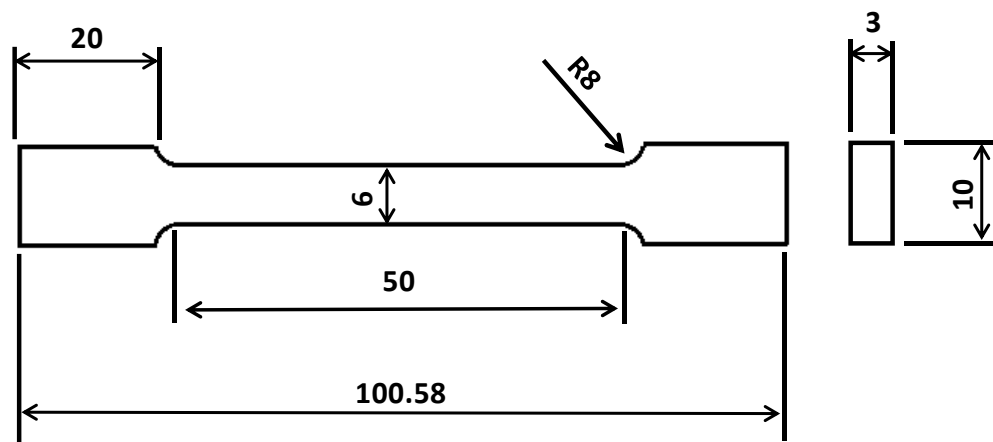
Schematic diagram of uniaxial tensile test specimen. Dimensions in mm.
